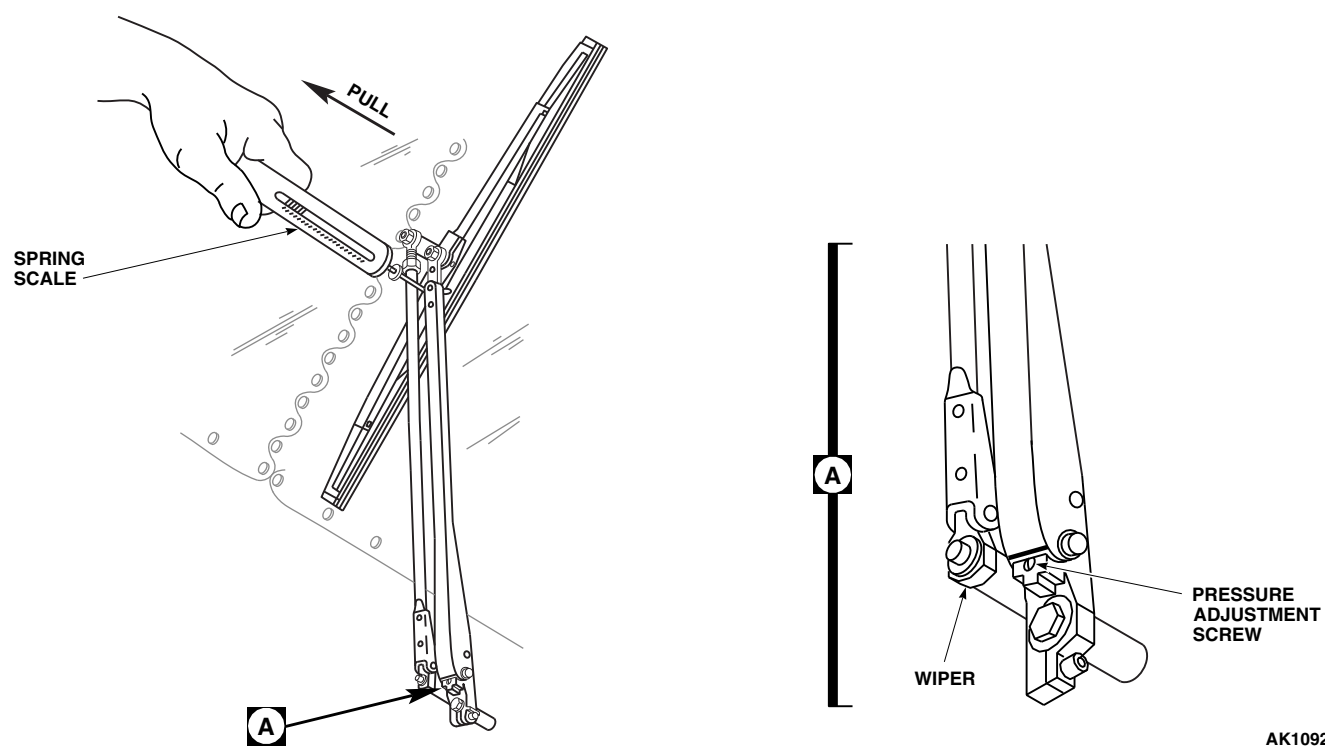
CHECK/ADJUST WINDSHIELD WIPER ARM PRESSURE
